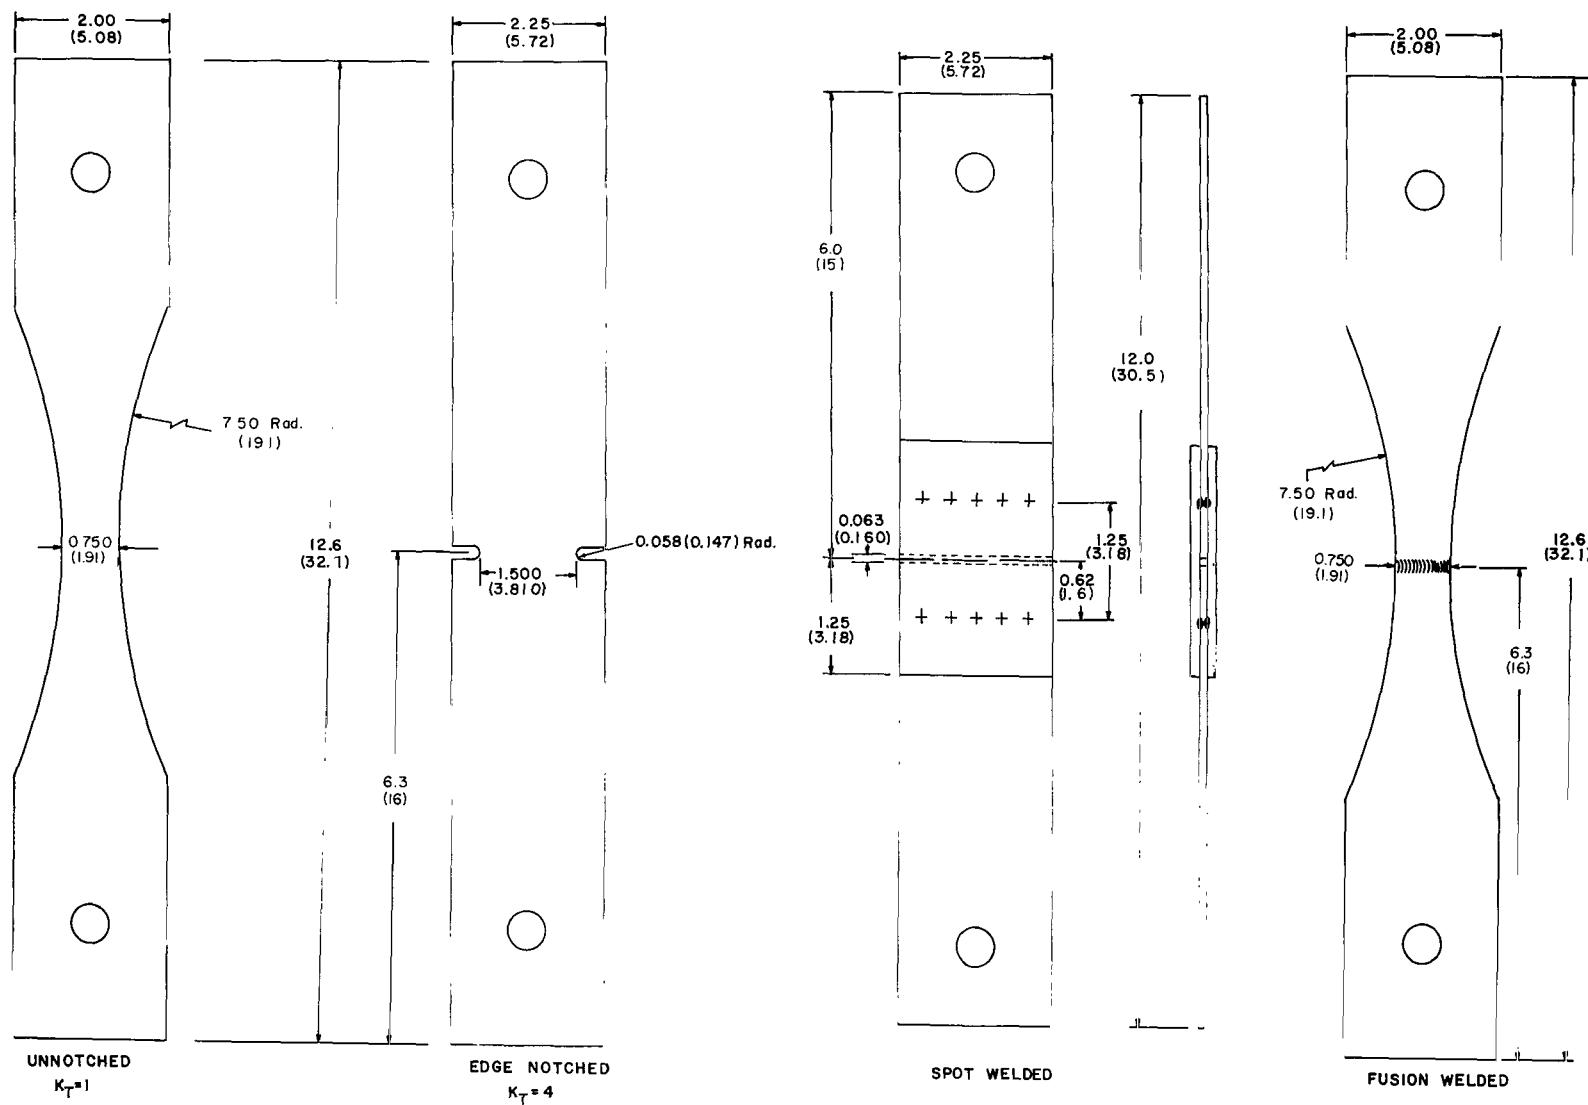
Fatigue specimens. All dimensions are in inches (centimeters).
